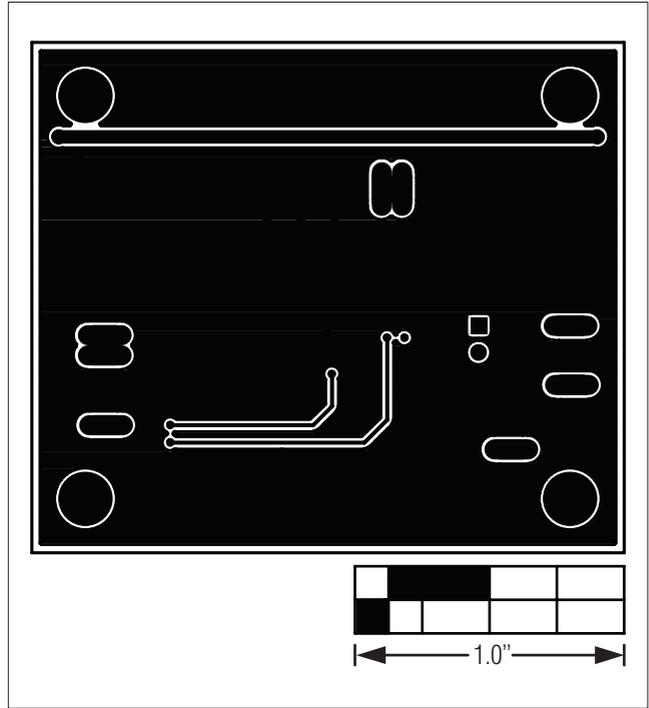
MAX15051 EV Kit PCB Layout—Solder Side
